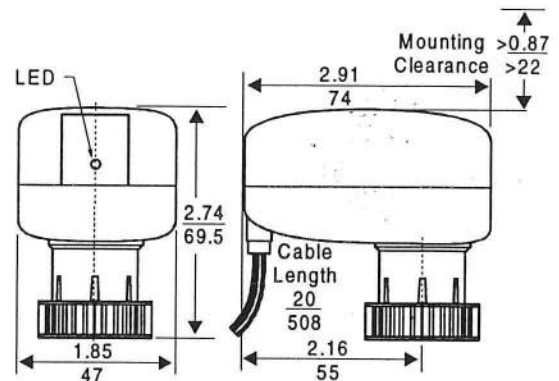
VA-7450 Actuator Dimensions, in. (mm)
